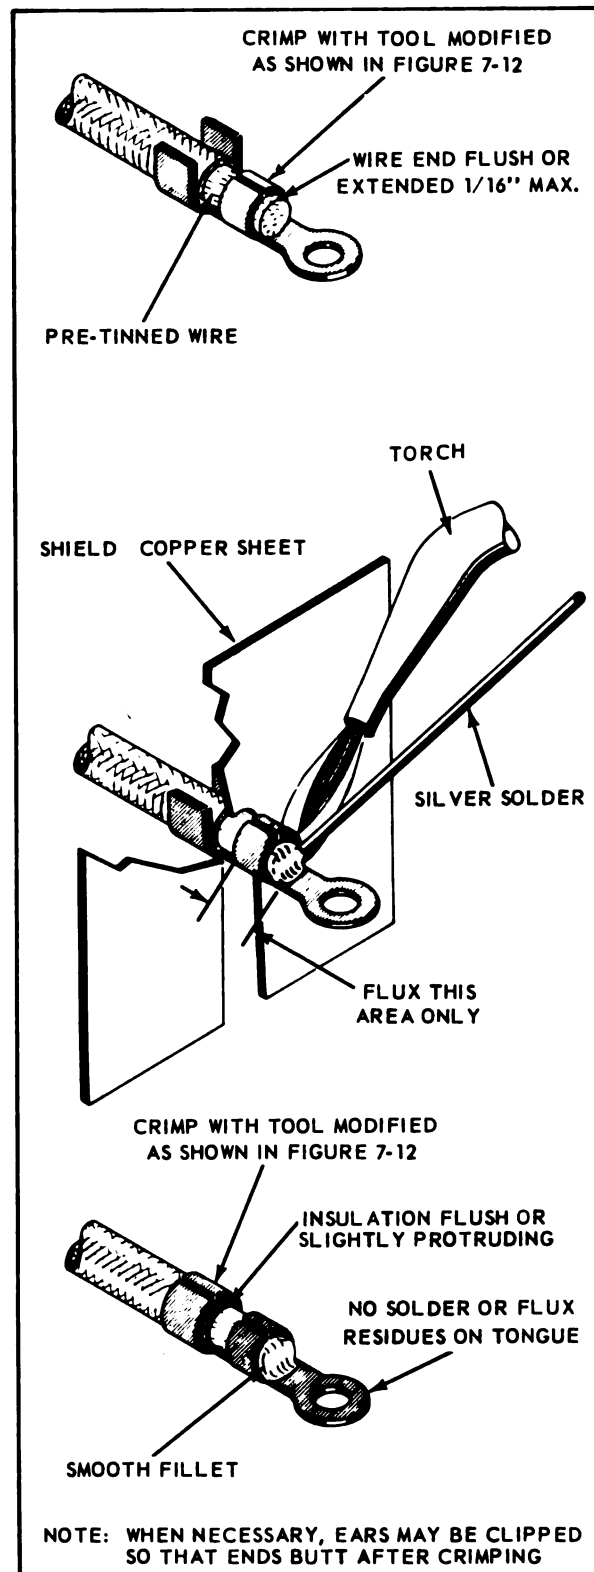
Silver Soldering Thermocouple Wire to Terminal
